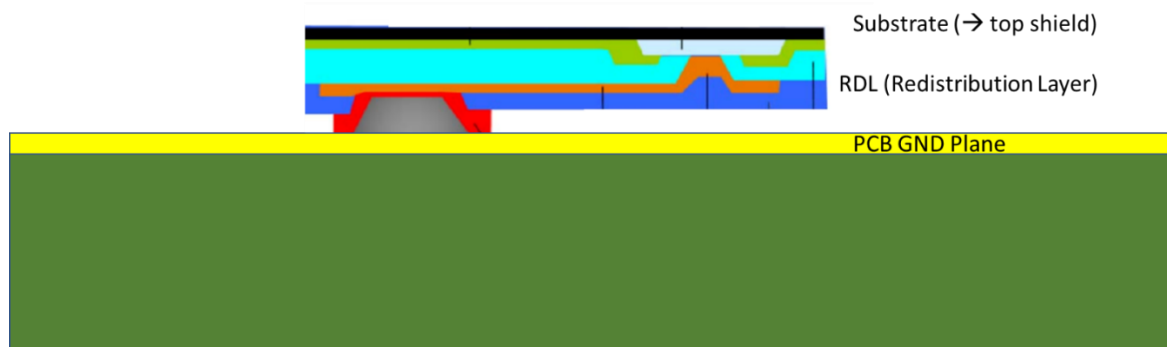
WLCSP Integrated Circuit Mounted on top of a PCB
